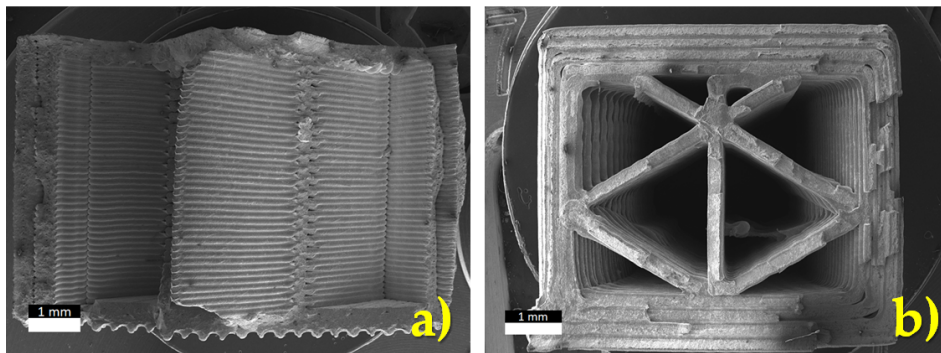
Morphology of the fracture surface of the fractured specimens manufactured using 17-4 PH: (a) flatwise; (b) upright.
